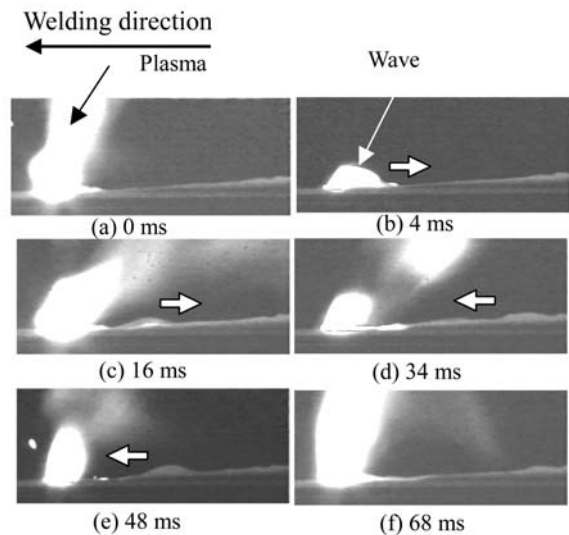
Molten pool oscillation during pulse laser welding.
